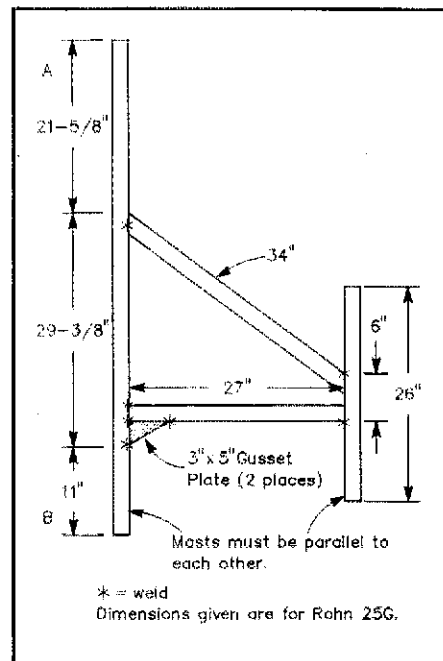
Dimensions for the side arm. Dimension A is noncritical, but should be long enough to allow the mast section to extend through the top-plate bearing with a few inches to spare. Triangular gusset plates welded to the side arm reinforce the pipe joint just above the rotator, which has proven to be a weak point without such reinforcement. Dimension B should allow an inch of clearance between the thrust bearing and the gusset plates when the mast is fully seated in the rotator.
